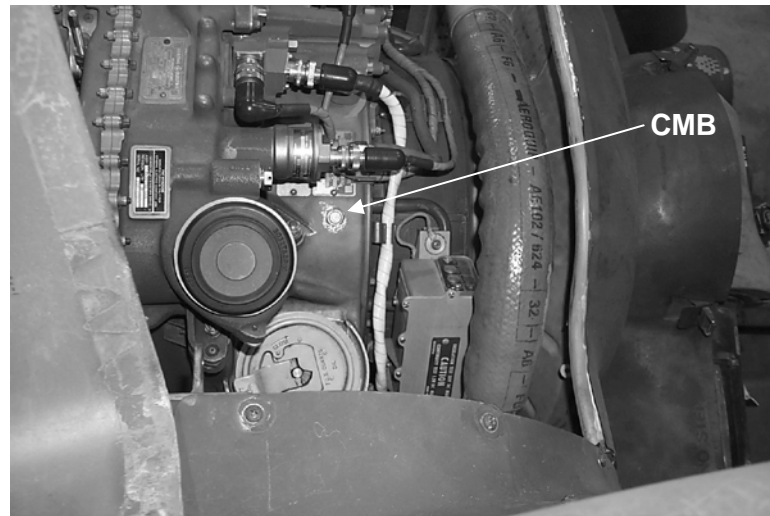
Engine Assembly (AH-64A/D) with CMB Installed
